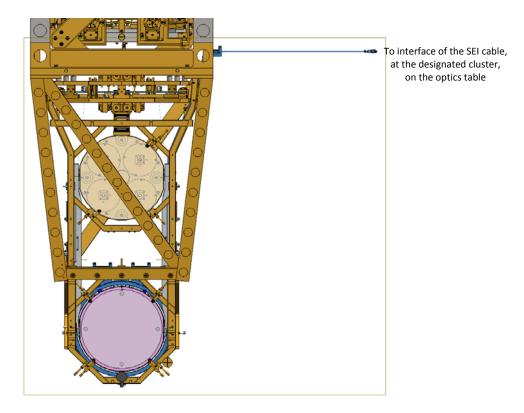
aLIGO 3D Assembly (D1002027) of RH and Electronics Components, highlighted, and integrated within the parent assembly D0901346.
